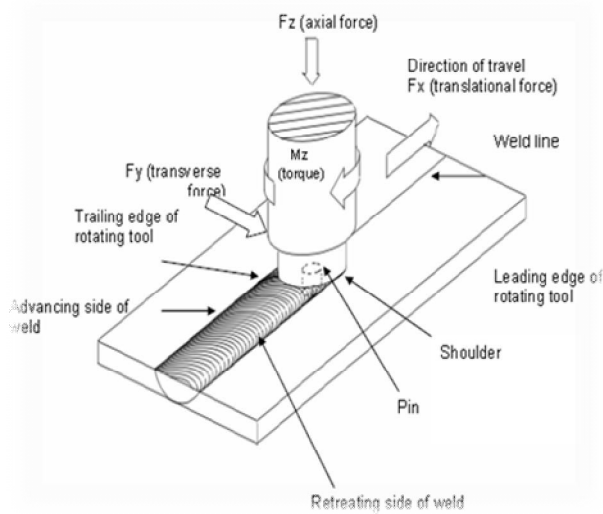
Schematic of the Friction Stir Welding Process^[2]
